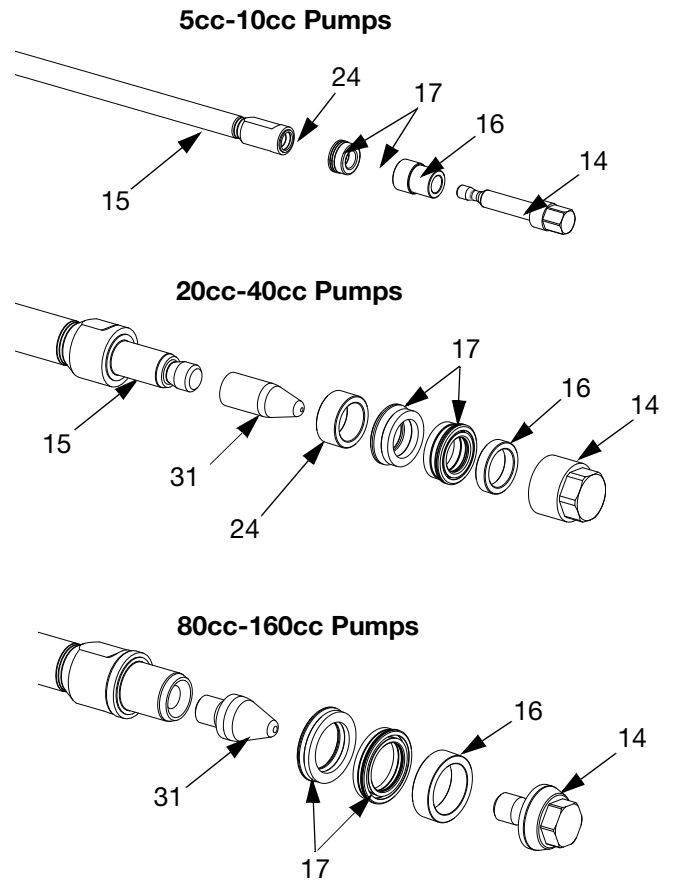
S5, S6, S7 Pumps Piston Assembly Tool (31)
